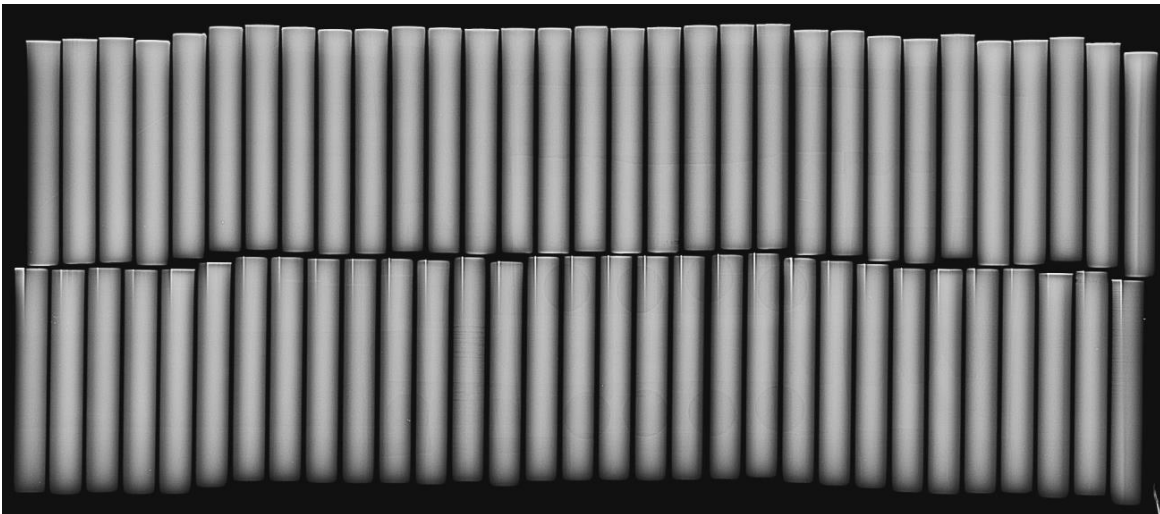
X-ray of Tensile Blanks for Machining and Heat Treating. (samples are 2 3/8 - 2 5/8 inches long).
